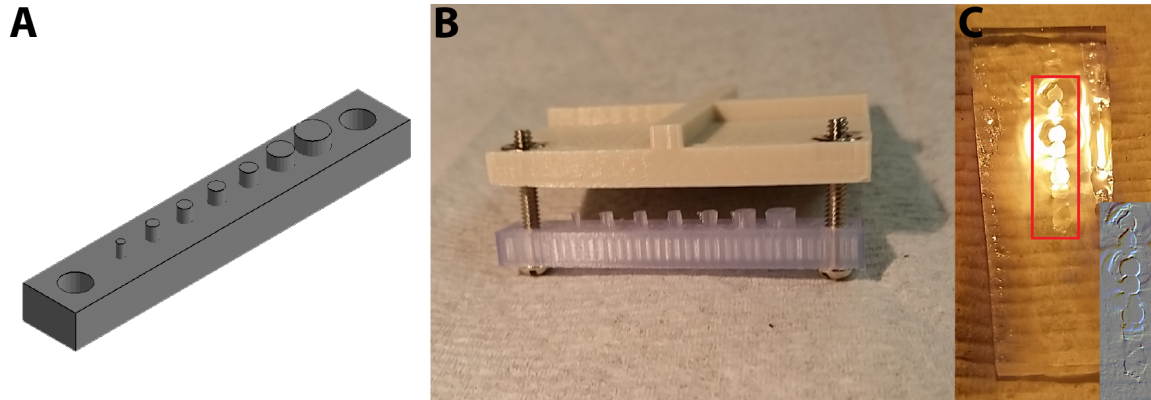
Masking PDMS from plasma. (A) Rendering of 3D printed masking mold, containing posts ranging between 1→4 mm in diameter. (B) 3D printed posts, and clamping jig assembled. (C) Bulk PDMS masked from plasma oxidizing and coated in MeOH to visualize hydrophobic pin locations, inset is pin region embossed to emphasize pin locations.
